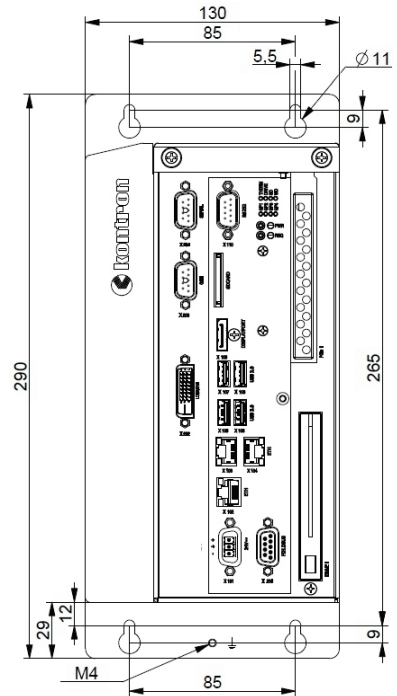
Dimensions: detail key hole (KBox C-102-1)
